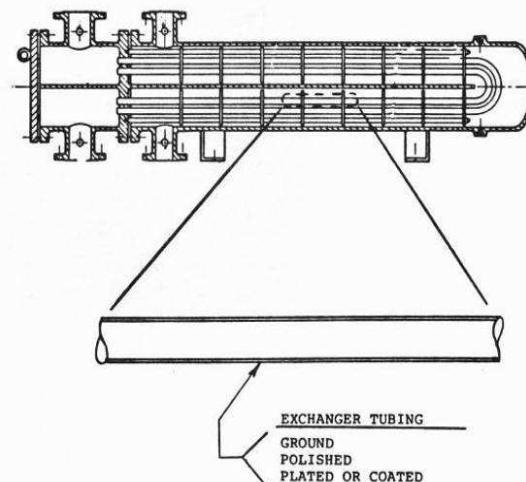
Low adhesion surfaces and shell and tube heat exchangers offer economical design options
